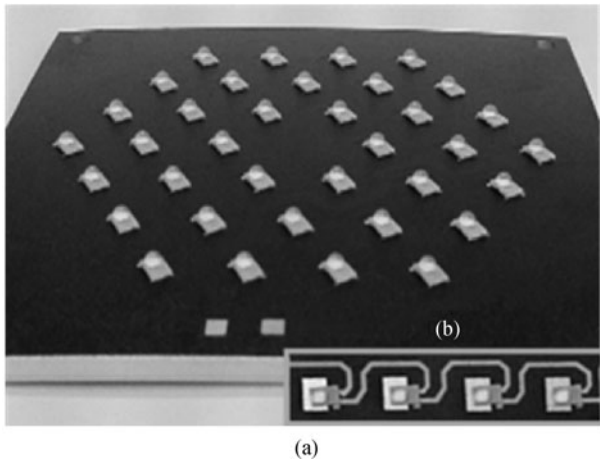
Ceramic-metal based 50 W LED array module after LED chip mounting. (a) After top insulation layer coating; (b) before top insulation layer coating (inset)
